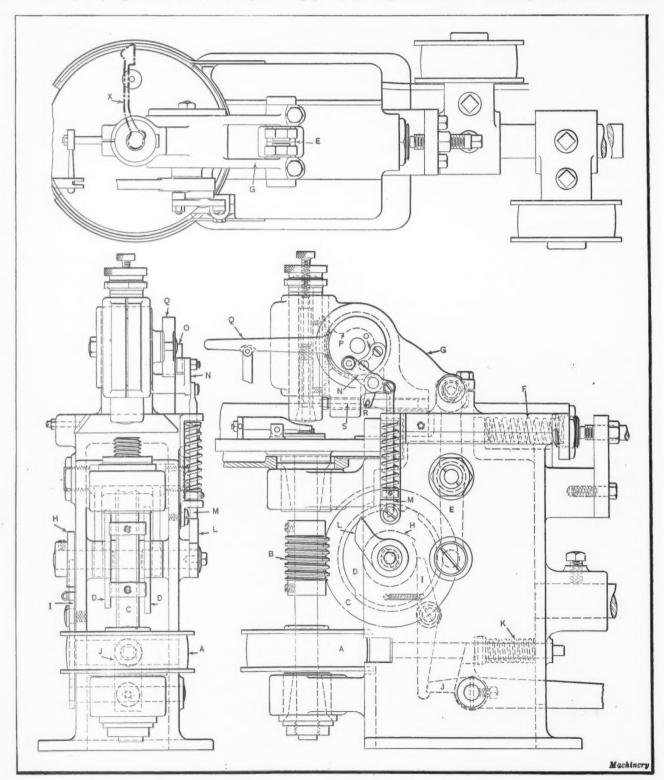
Assembly Views of Machine for producing the Ball Groeve in the Type Bar
